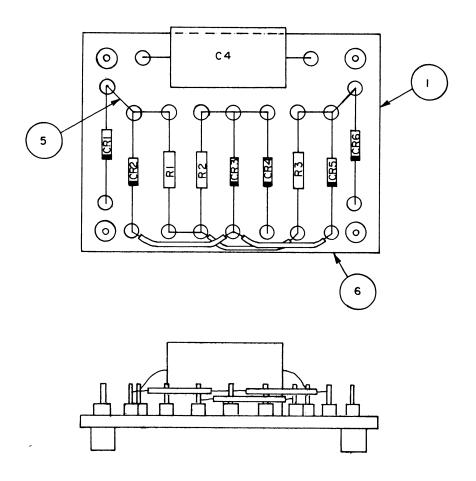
Board Assembly Power Supply 1C 694 Serial No. 241 & Up
